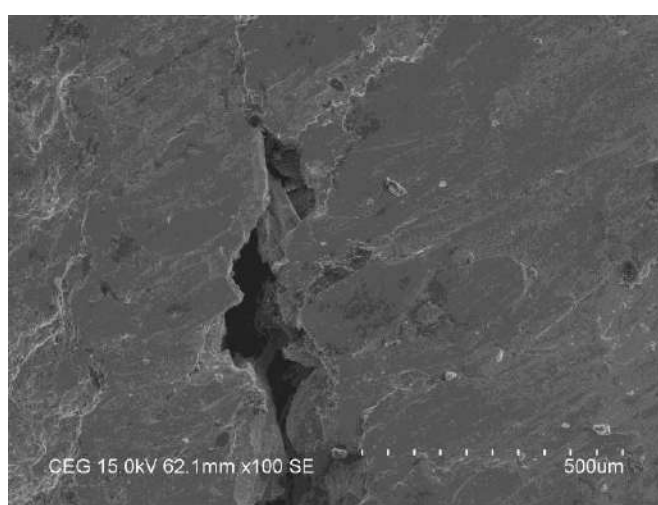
Factography images of TSFL tested sample welded at the weld pressure 3.7kgf.
